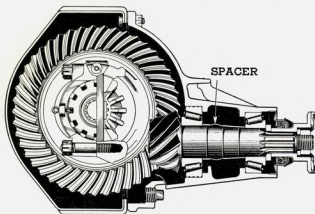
Model 1901 Differential Carrier. The Unit Used on 1900 Cars is of Similar Design
